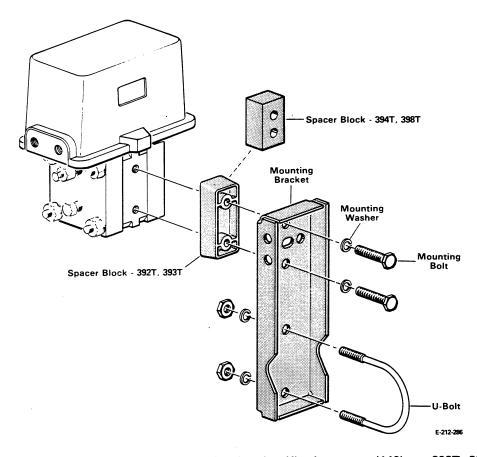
Assembling Optional Mounting Bracket Kit, Accessory (146), on 392T, 393T, 394T, or 398T Transmitters with Flange Face Connections
